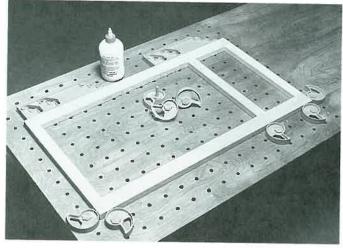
Cam clamps, positioned on the locator board, adjust to frame sizes. (Meyer Vise Co.)
